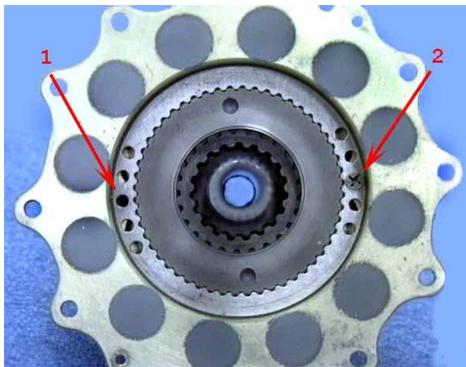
STS-80 actuator assembly showing missing and loose screws. NASA Image
